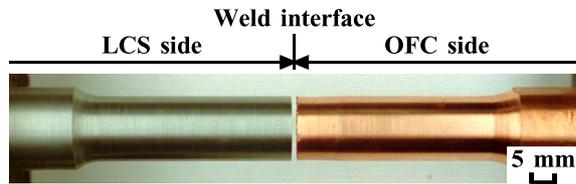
Example of joint tensile test specimen appearance after tensile testing; friction pressure of 30 MPa.
